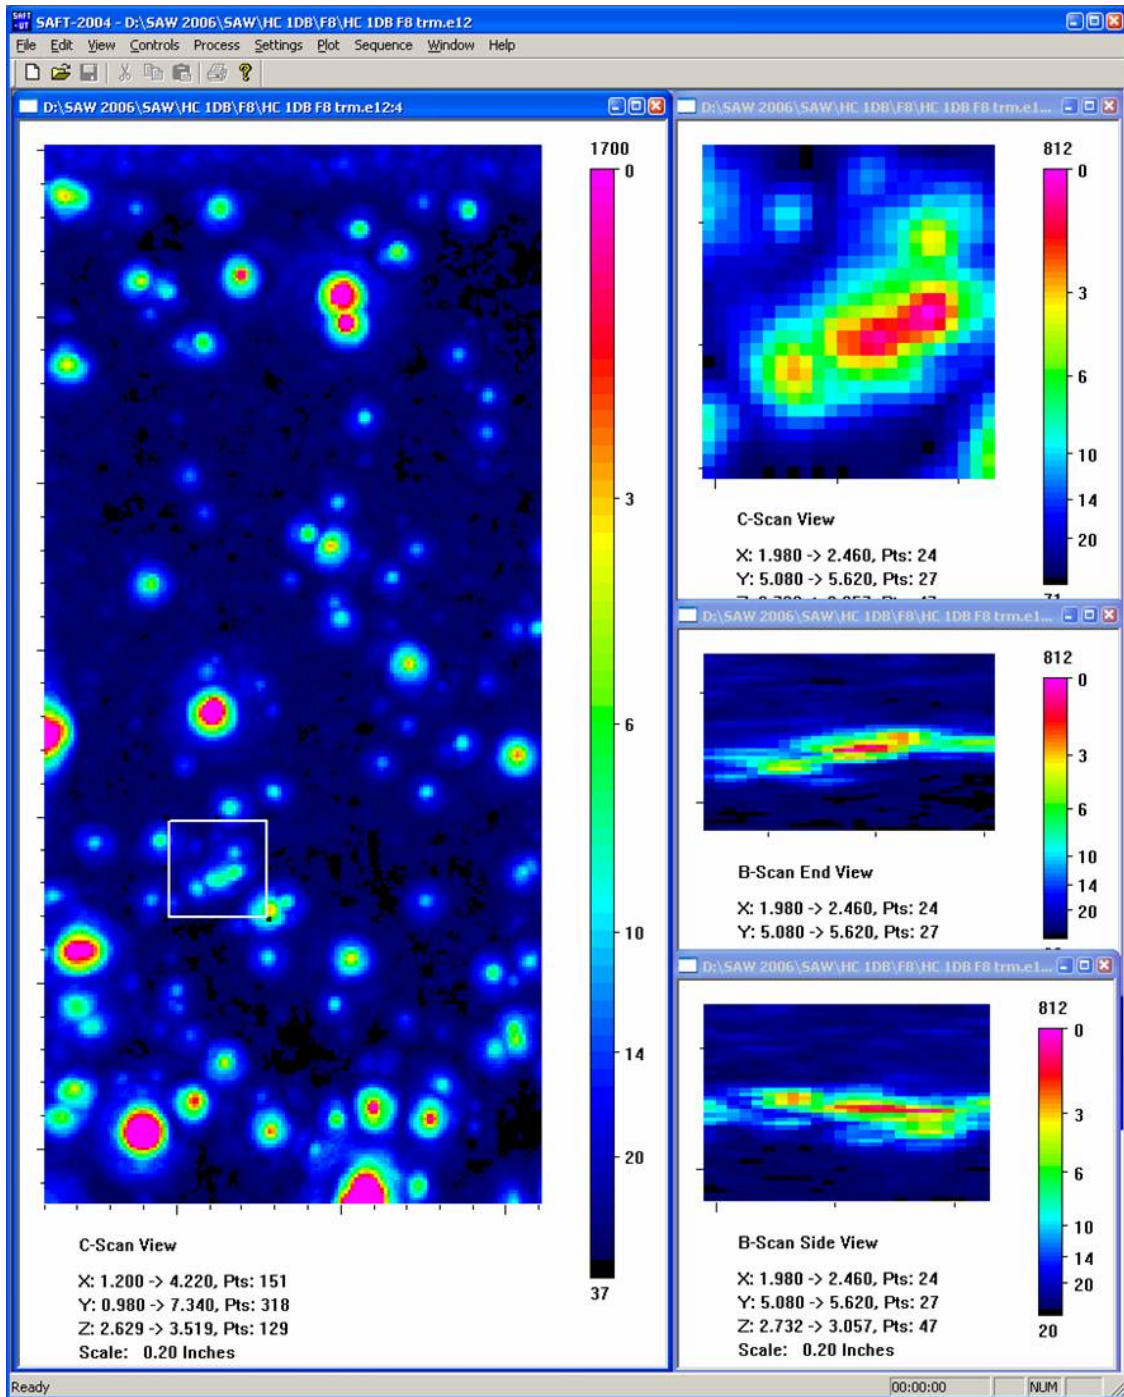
a 10 MHz F8 Immersion Testing Images of Small Fabrication Flaw: HC6A. This figure shows immersion testing data of a 7-mm flaw indication from the weld-normal testing of large weld segments. The flaw indication is identified in the box drawn in the SAFT-UT image on the left in the figure. A close up of the flaw in the C-scan view (top right) shows 4 unresolved flaws.
